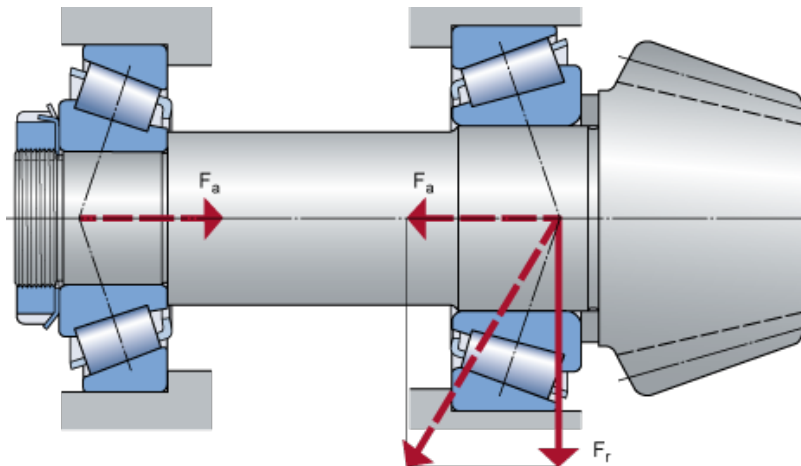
Axial and Radial Rolling Bearing Load. [14].
